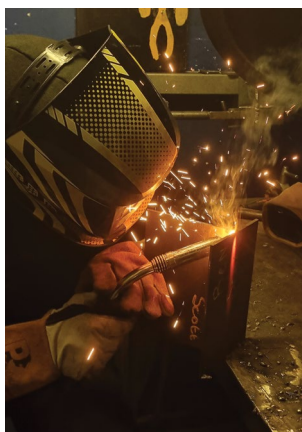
An apprentice MAG welding a qualification test piece. Courtesy of EngEPA
